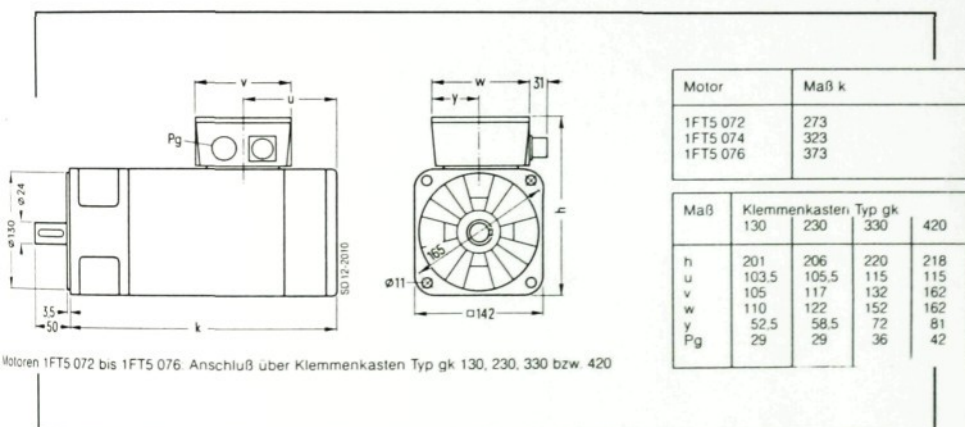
dimensioned sketch of the motors 1FT507x
